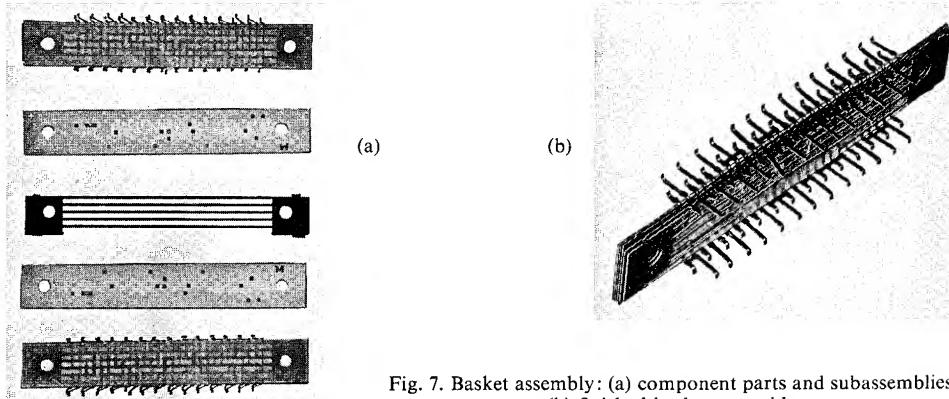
Basket assembly: (a) component parts and subassemblies; (b) finished basket assembly.
